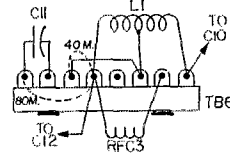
Sketch showing coil mounting. ( $TB_6$  is H. H. Smith 870).
